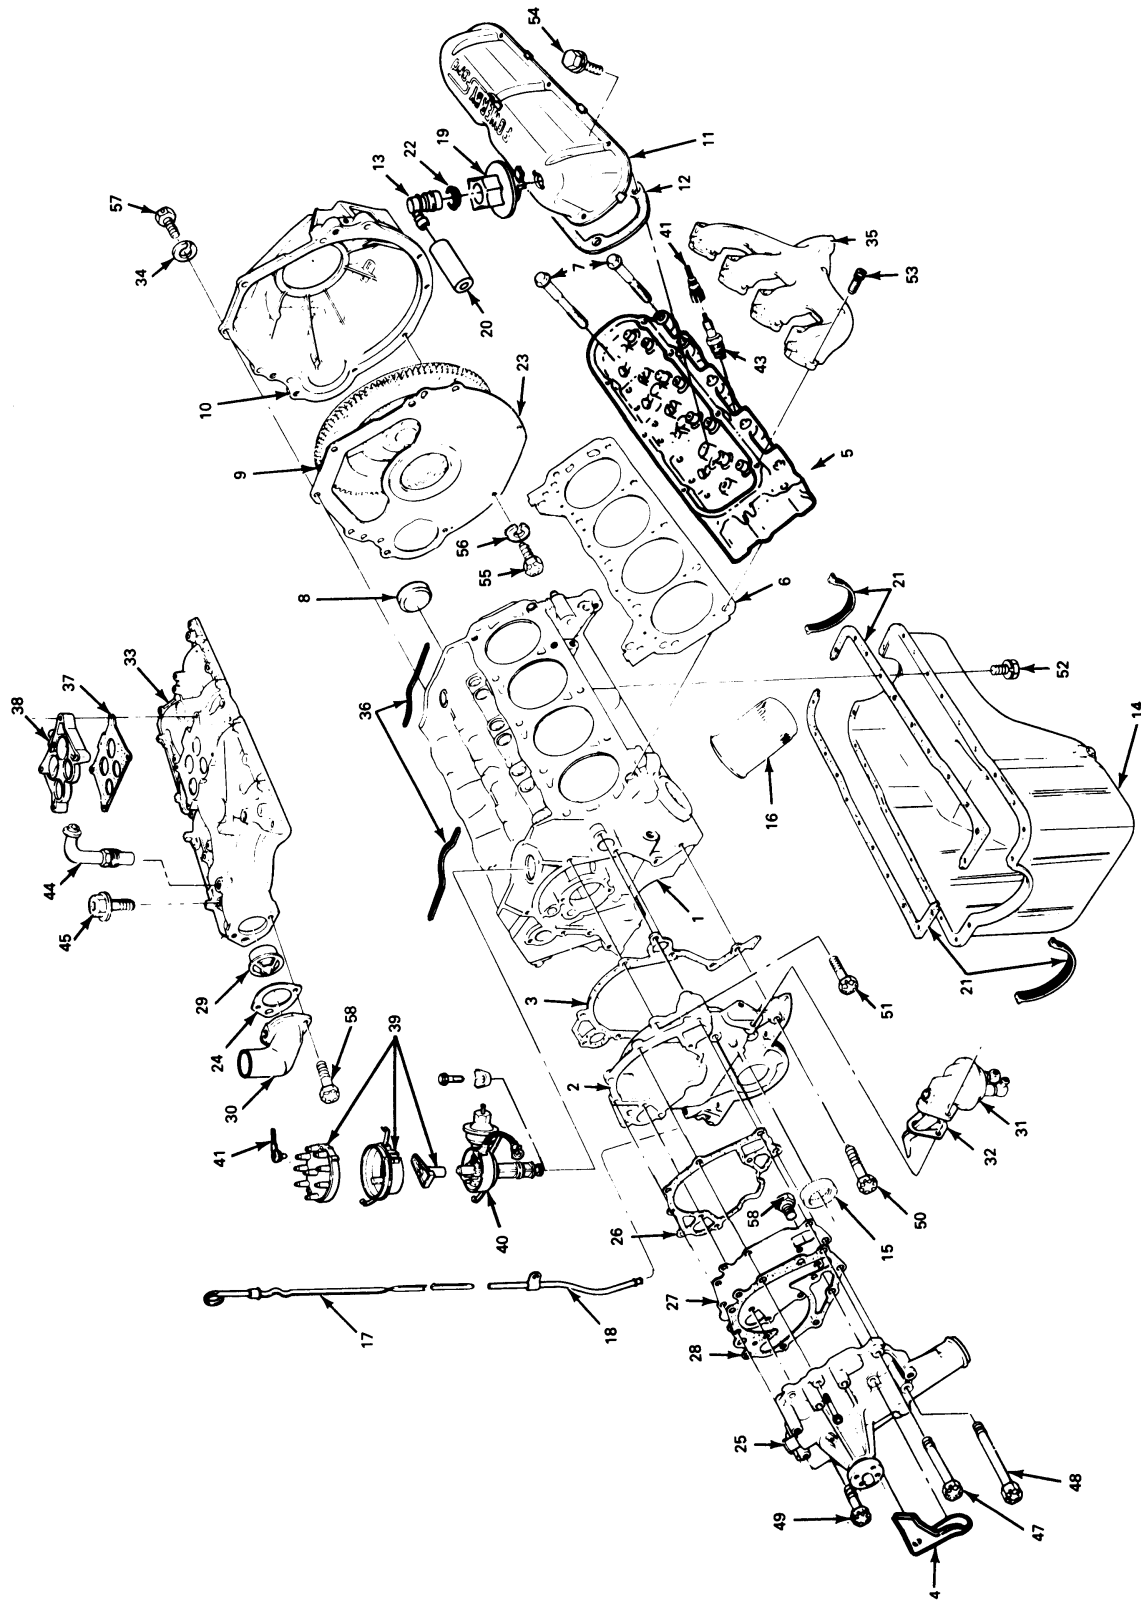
External Exploded View—7.5L (460 CID) V-8 Engine
